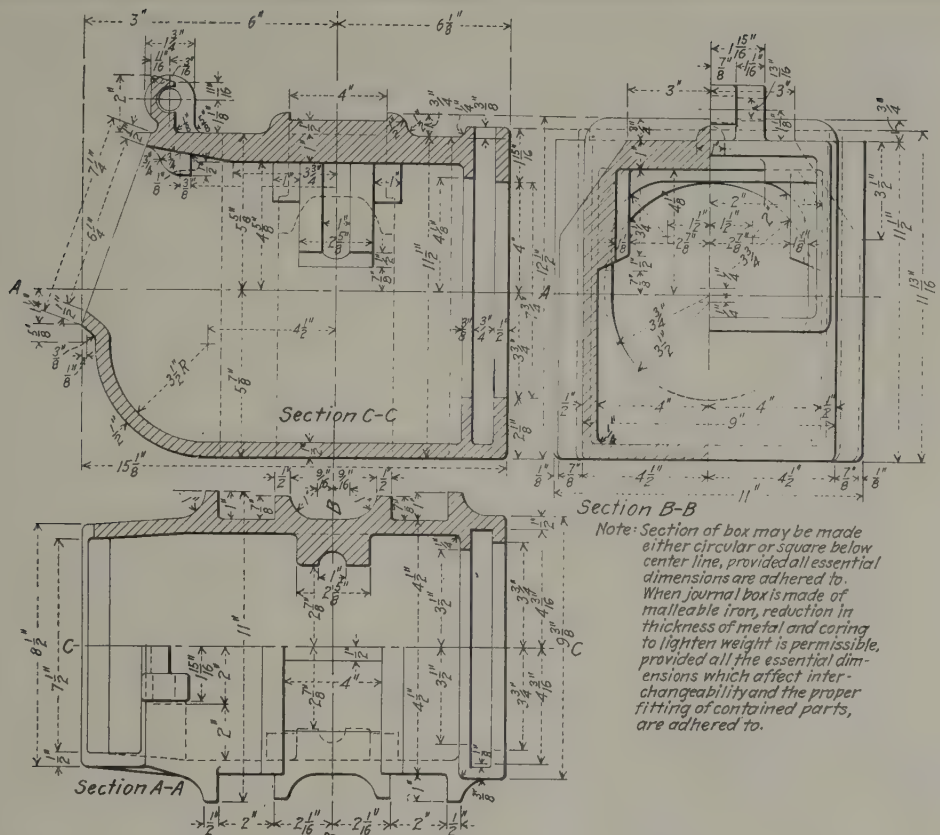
M. C. B. Standard Box for 5 in. by 9 in. Passenger Train Car Journal. (M. C. B. Sheet 8A.)
